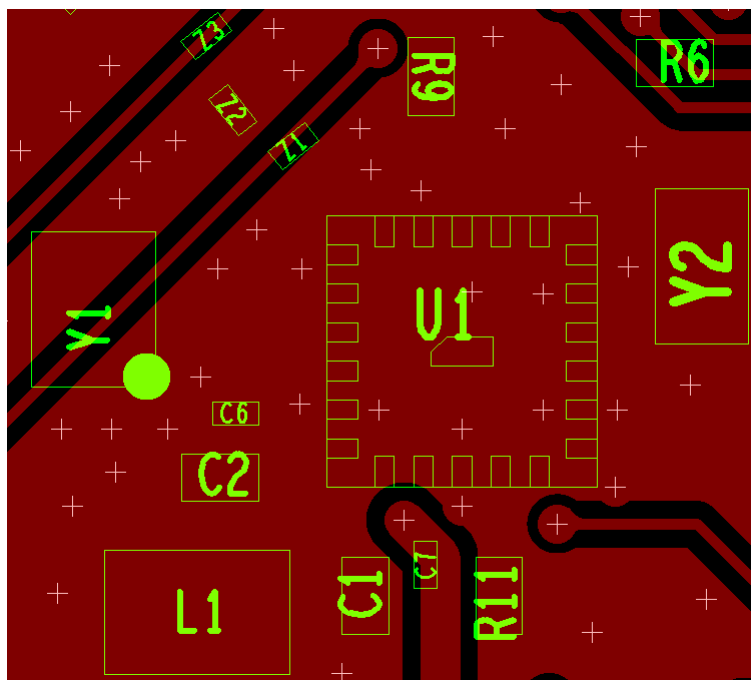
FCGQFN24 PCB placement and routing – INT2 layer
